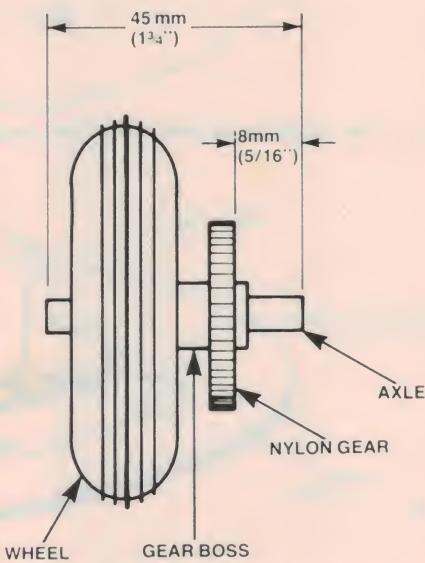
Wheel assembly. Wheel hub butts against gear boss and the two are glued at this point.
